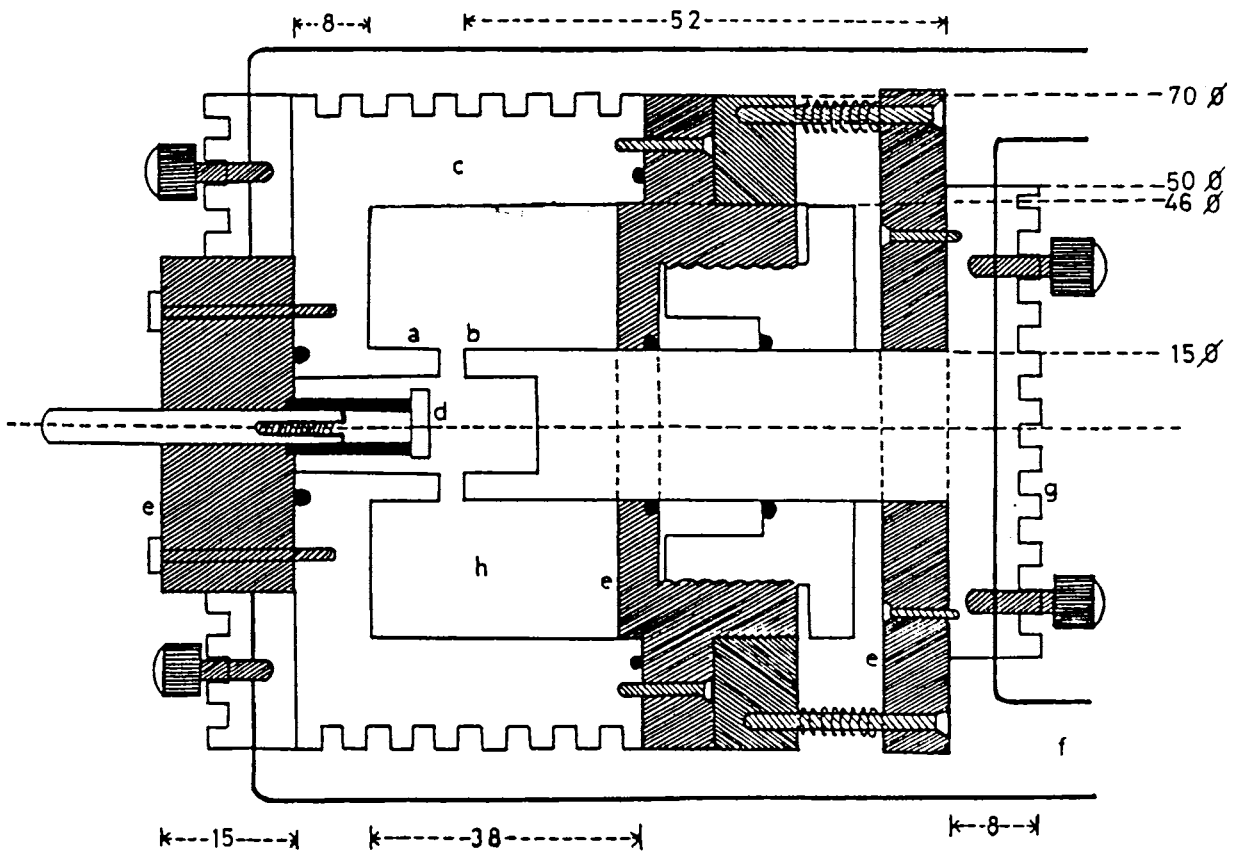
Sectional view of the triggered spark gap switch assembly (all dimensions in mm).
